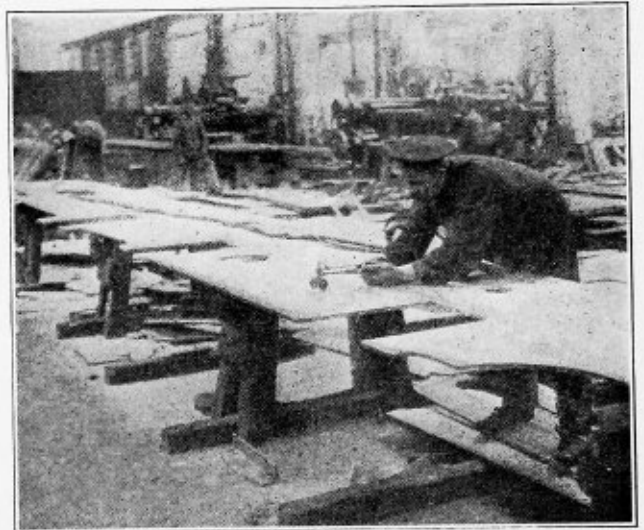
CUTTING OUT FRAME PLATES WITH TORCH.
